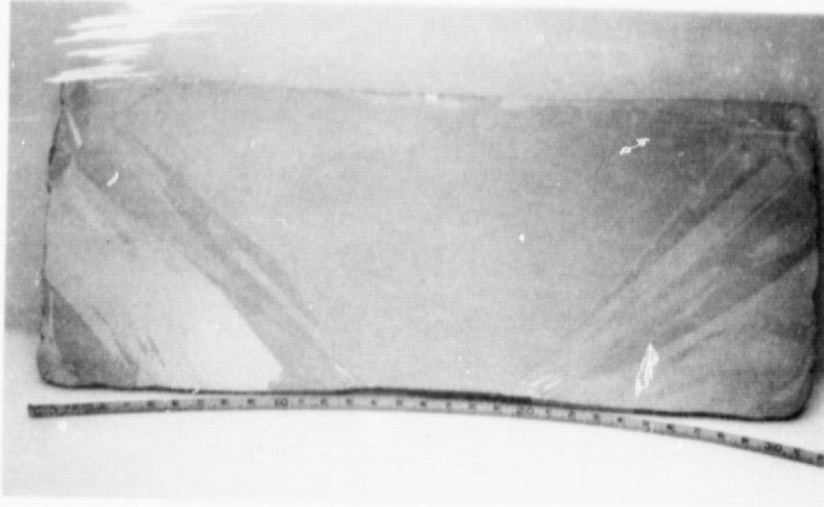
Ground and etched cross-section of ingot cast in run 41-51
